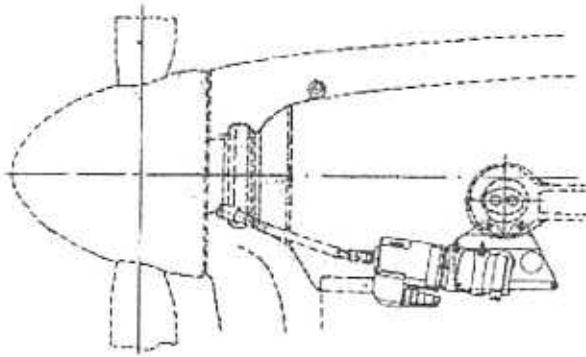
Locating the pitch control mechanism on the M 6-III engine
